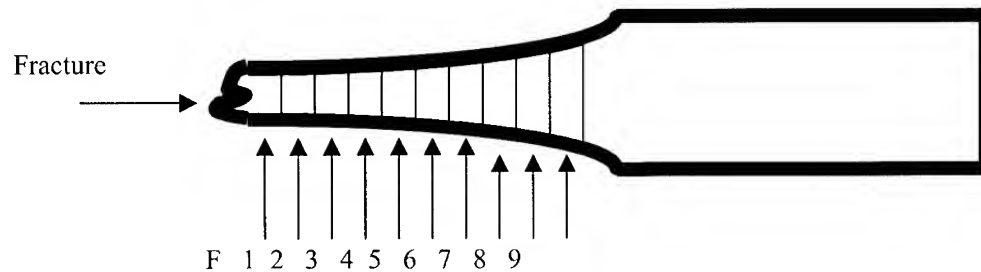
Diagram illustrating the sectioning of the fractured fatigue samples.
